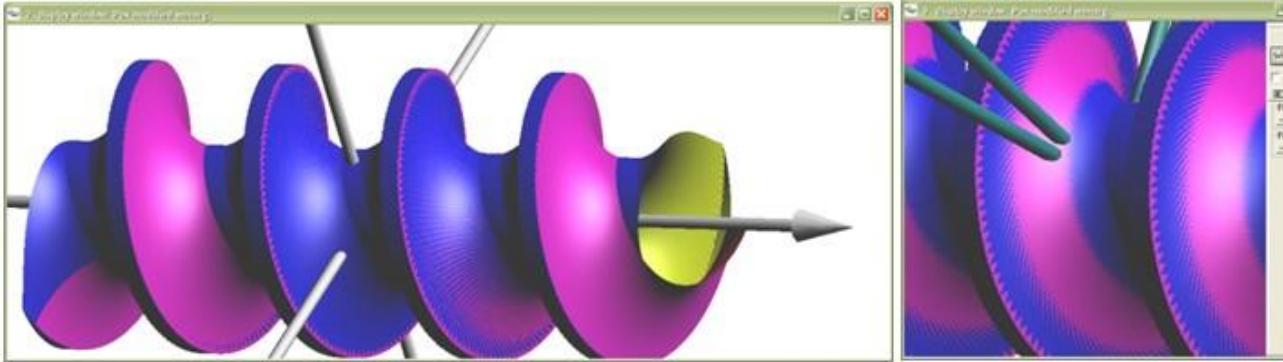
Spiral bevel gear segments and the ellipse contact pattern
